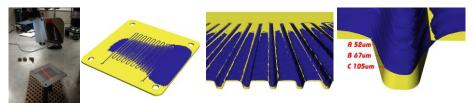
3D laser scan, two CAD to part comparisons and in channel measurements
